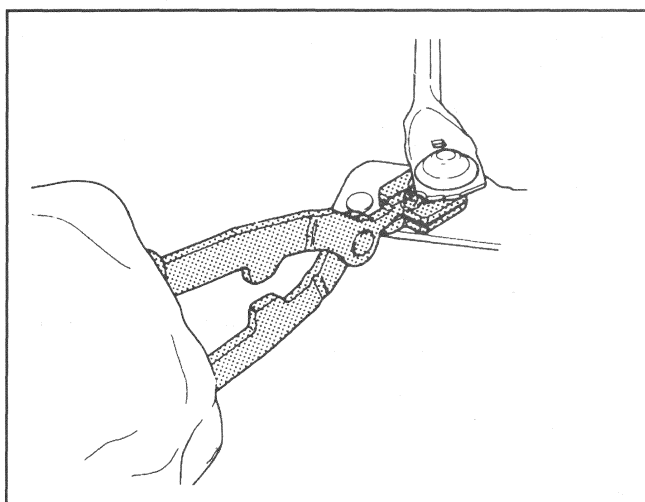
J 39232 Wiper Linkage Separator (Typical Usage)
